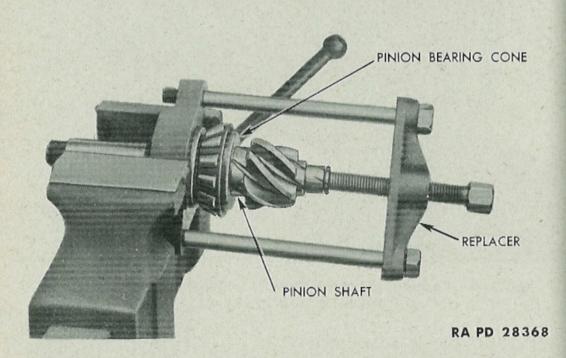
Installing Bearing Cone on Pinion Gear Shaft with Remover and Replacer 41-R-2385-135 and Adapter M8-122B
